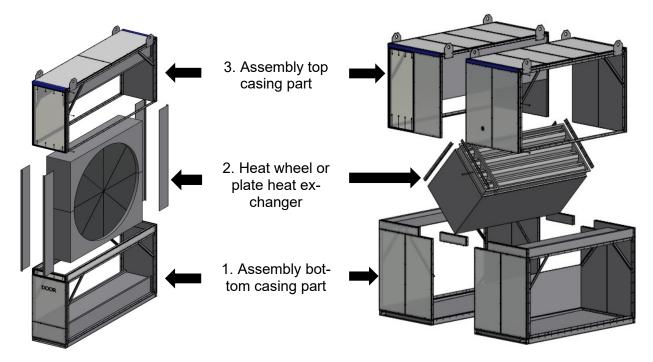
Assembly order of disassembled heat wheel or plate heat exchanger casing section
